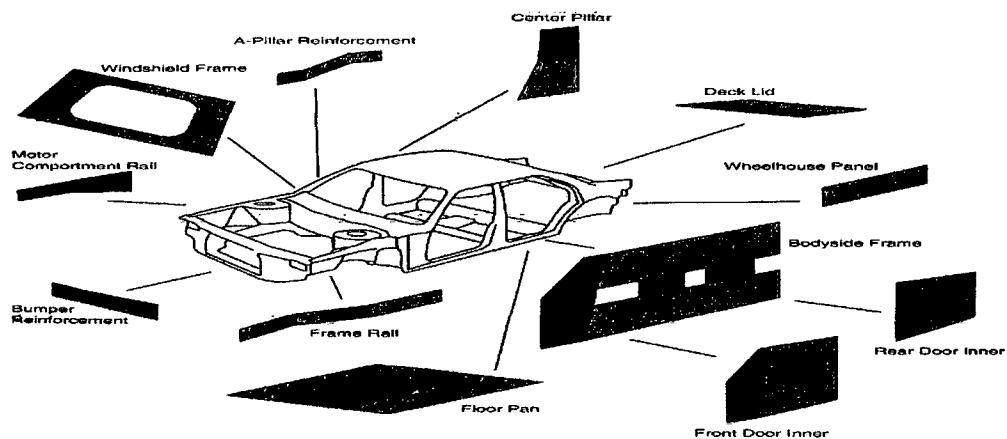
Exploded view of current and potential automotive tailor welded blank applications (Kinsey, 2003)
